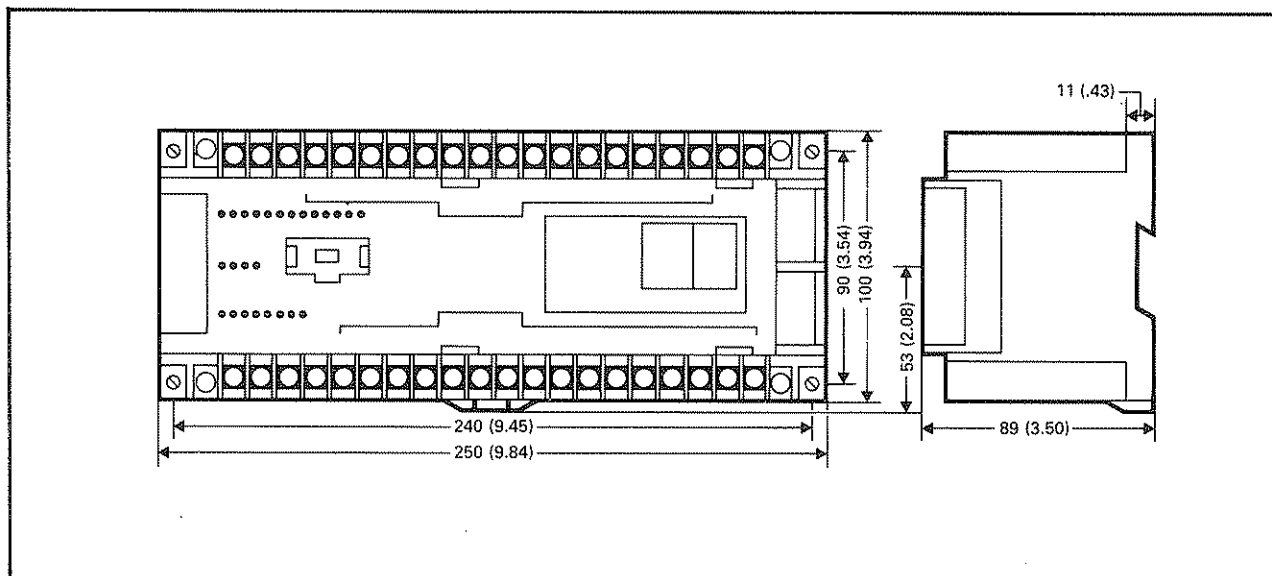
External Dimensions for PC-100 in mm (in.)
